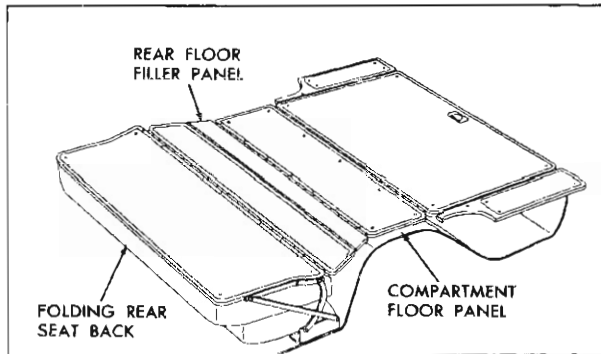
Folding Rear Floor Filler Panel Assembly
